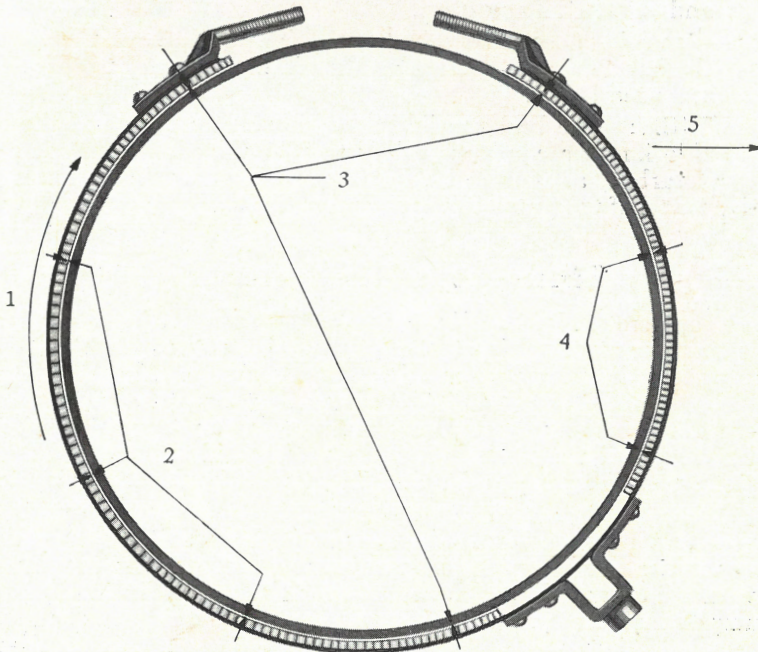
Wheel Brake Band Adjustment—Four-Wheel
